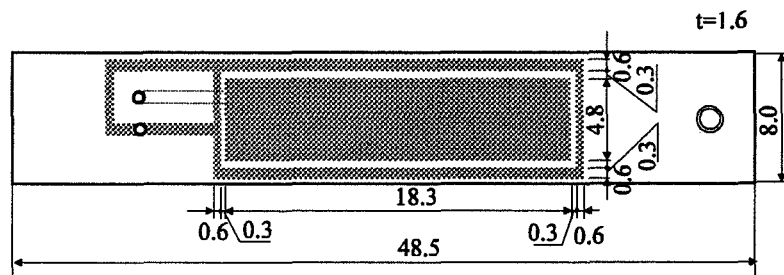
Detail geometric dimensions in mm of the gap sensor plate.
